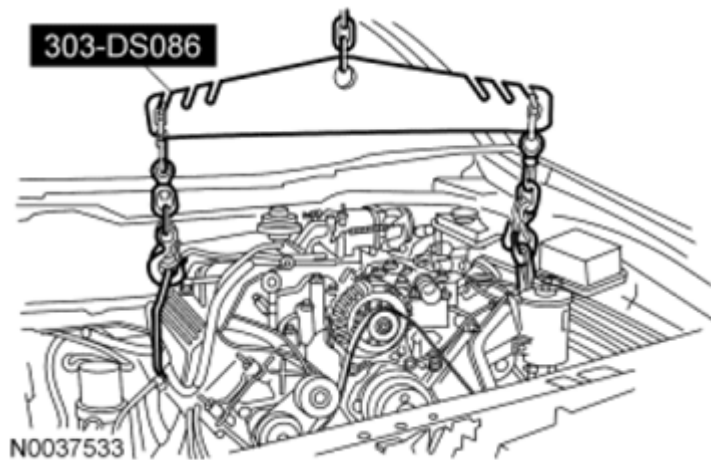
Identifying Engine Lifting Bracket (303-D087)
